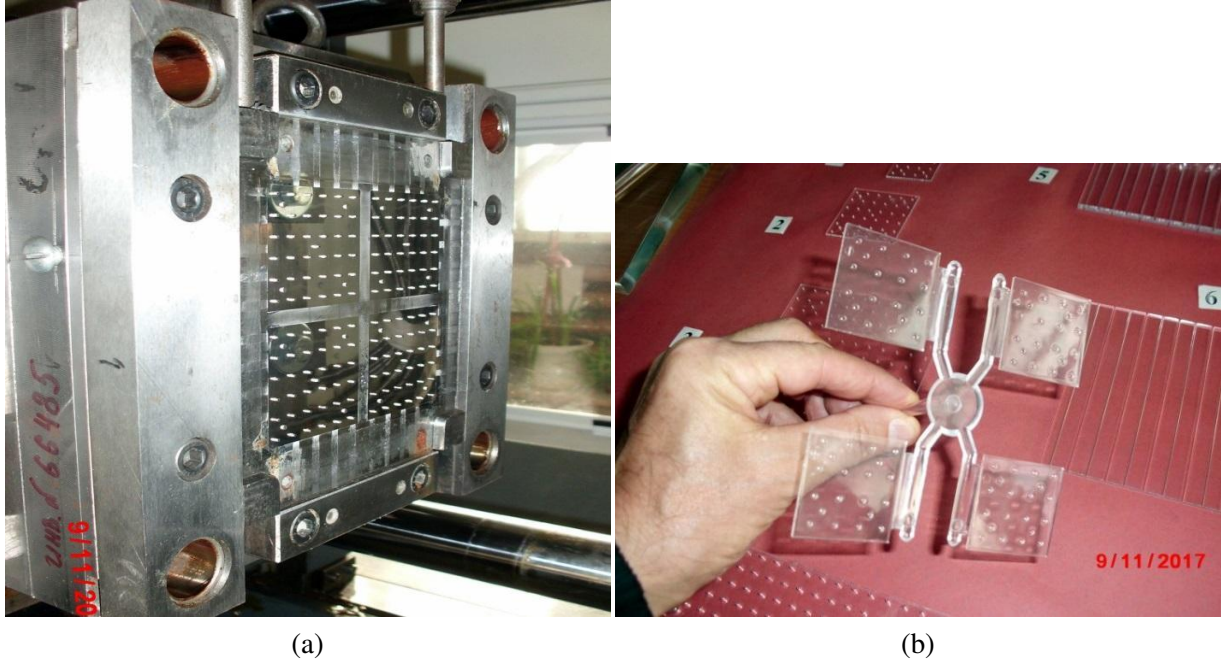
a) 4-set matrix for scintillator production; b) The scintillation plates released from the molding machine, details of the molding system are visible.
